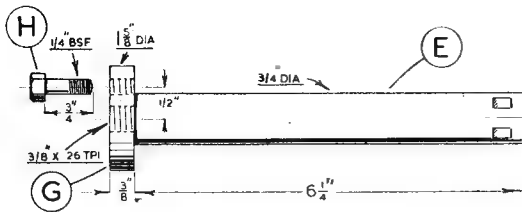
The crankshaft E; the crank disc G; the crankpin H
